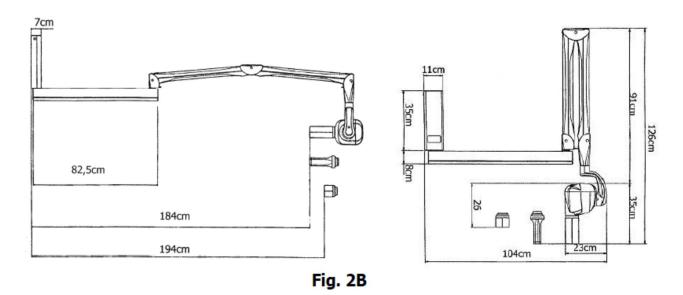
A, 2B, 2C give the overall dimensions of the possible supply conditions:
